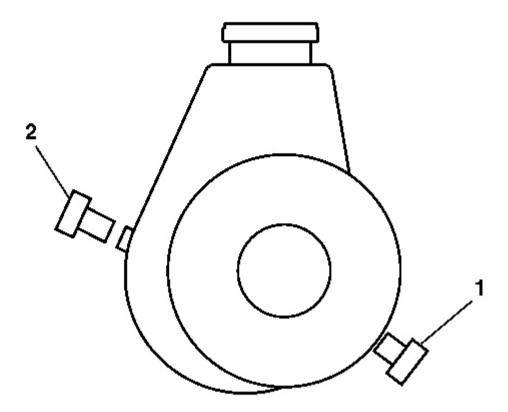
Installing Plugs Into Pressure & Return Port Courtesy of GENERAL MOTORS CORP.
